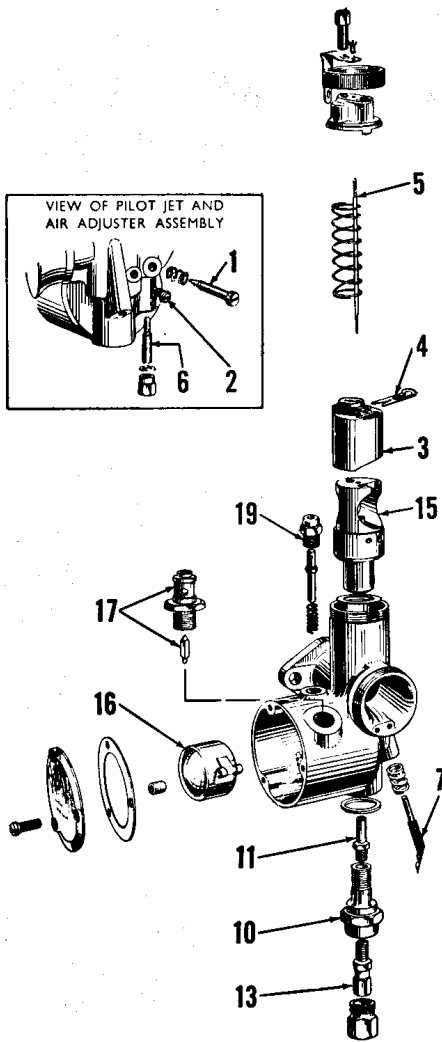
Exploded view of typical Amal Monobloc carburetor.
